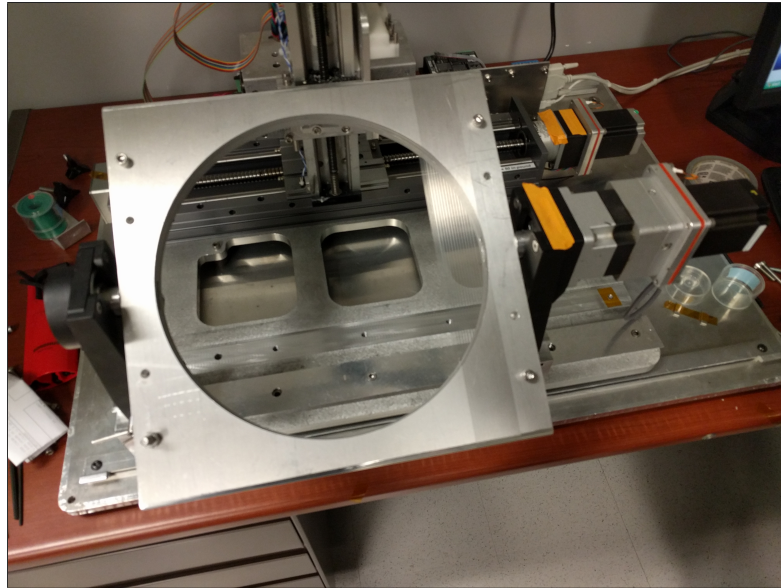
A photograph of the wire grid winding machine at UCSD with a large frame for winding the 26.1 cm outer diameter wire grids mounted. A wire grid pair is starting to be wound as can be seen near the right end of the frame.
